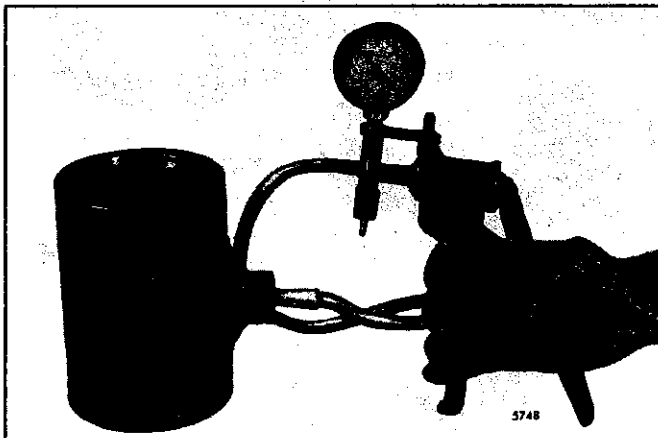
Checking Piston Pin Retainer for Proper Sealing with Tool J 23987-01
